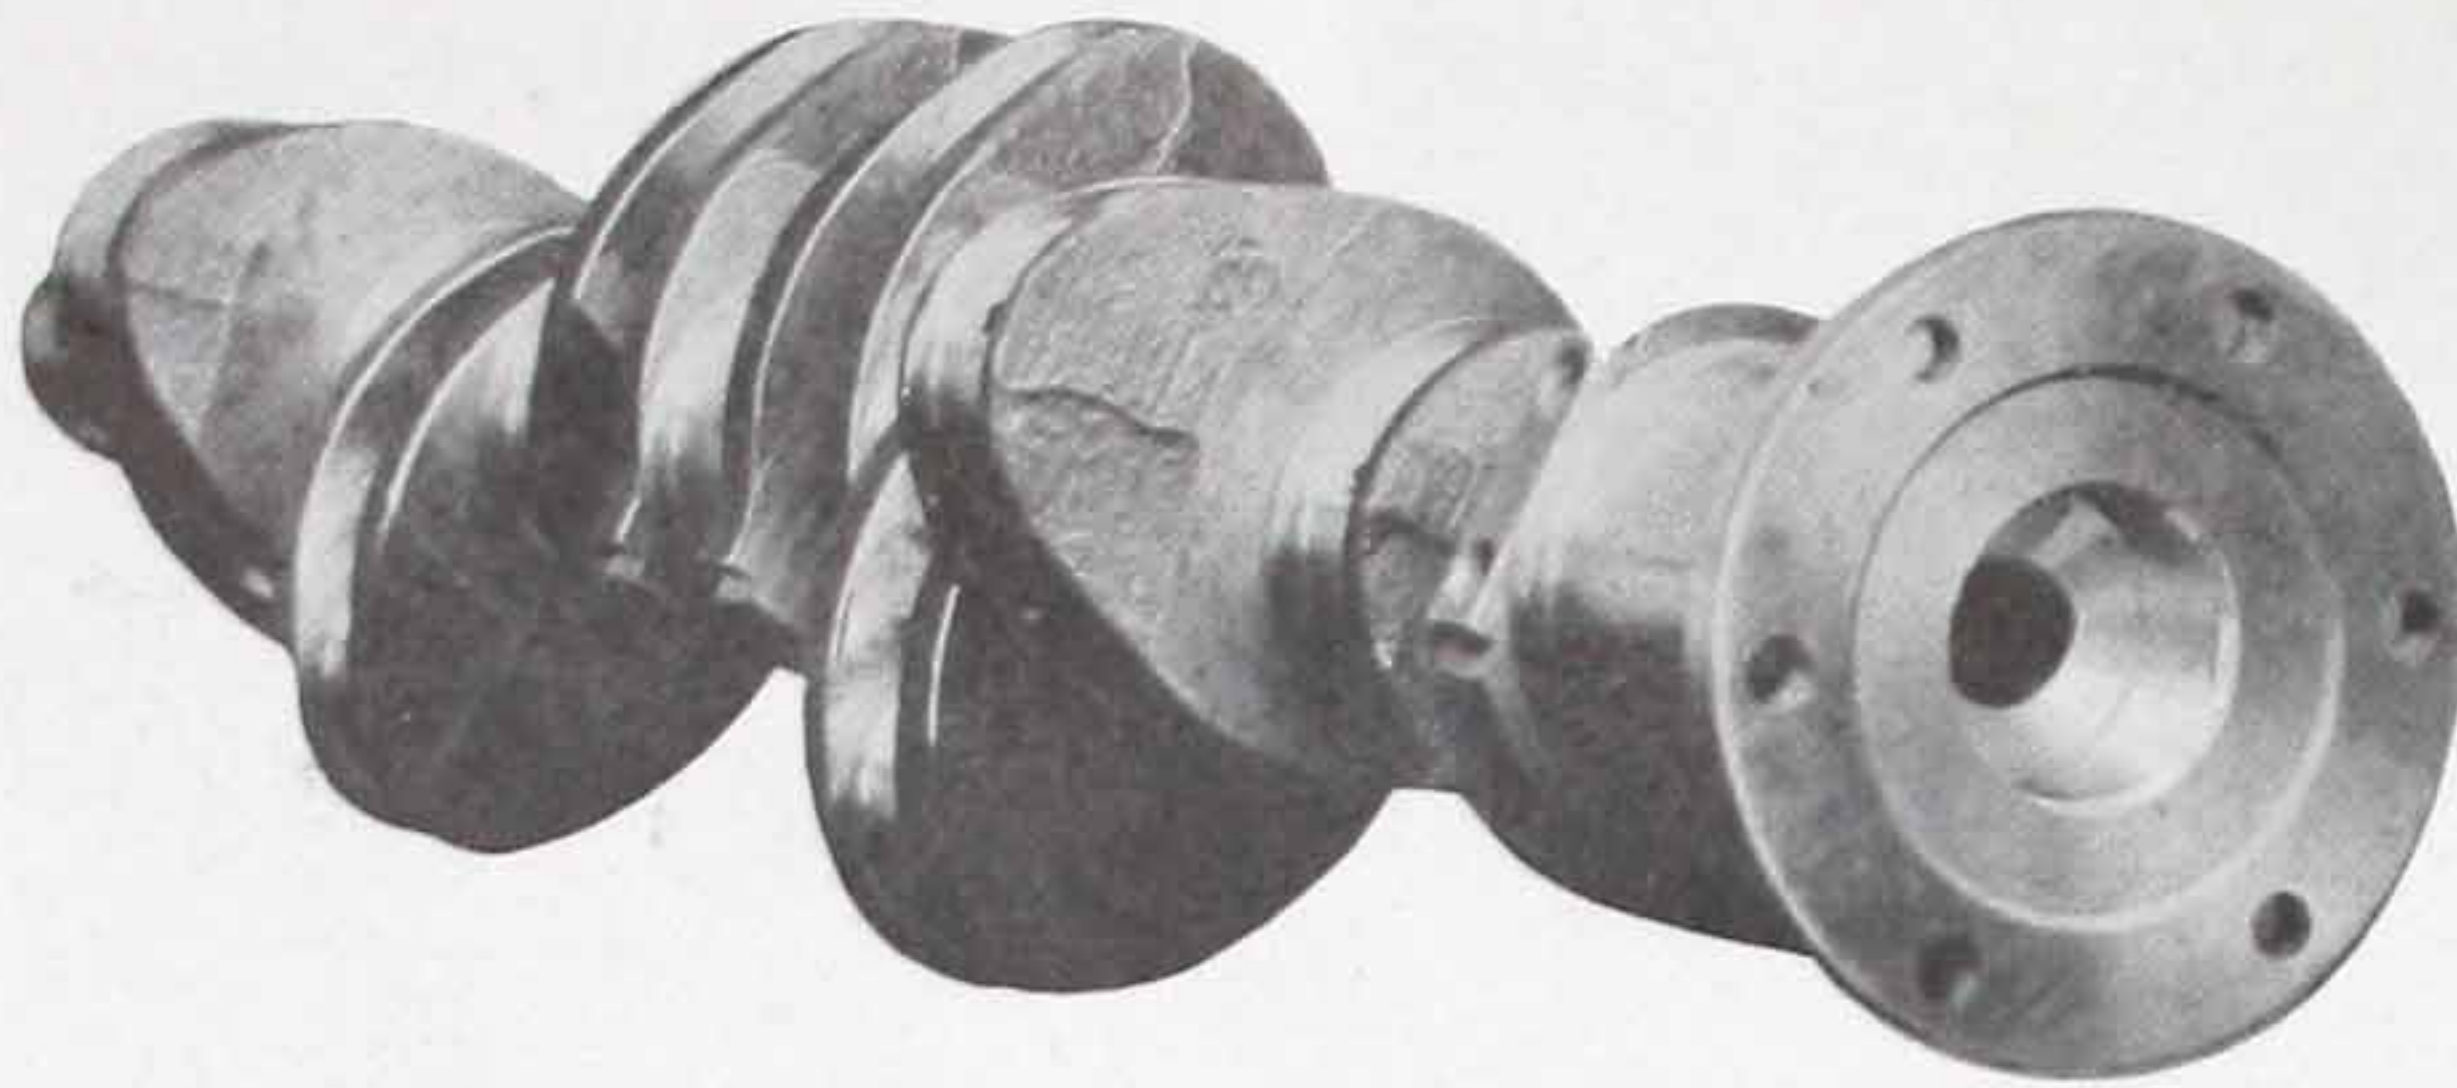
Another automotive part of high cost and with precision crank pin and journal surfaces is the crankshaft. In process or storage or shipment, a suitable rust preventive on the frictional surfaces is necessary.
